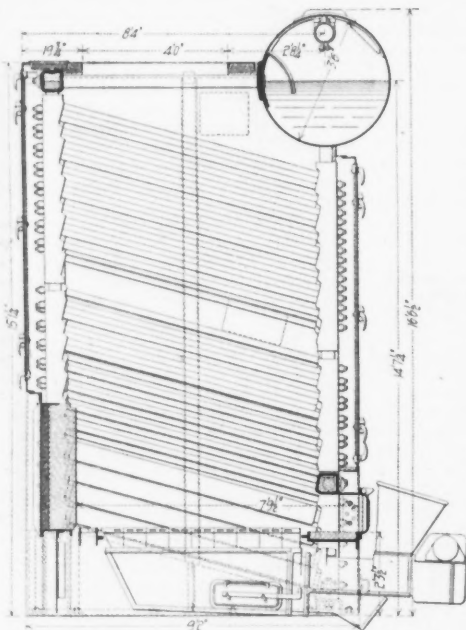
Water-Tube Boiler with Mechanical Stoker for Lake Steamer "Pennsylvania." The Babcock & Wilcox Co., and the American Stoker Co., Builders of Boiler and Stoker.
